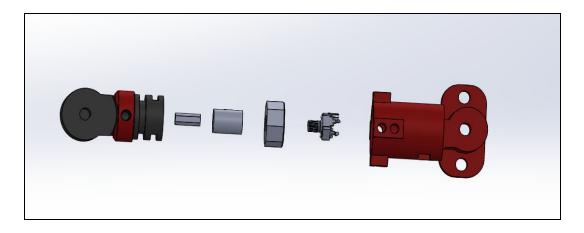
Exploded view of Joint W0 for passive RoboPuppet
